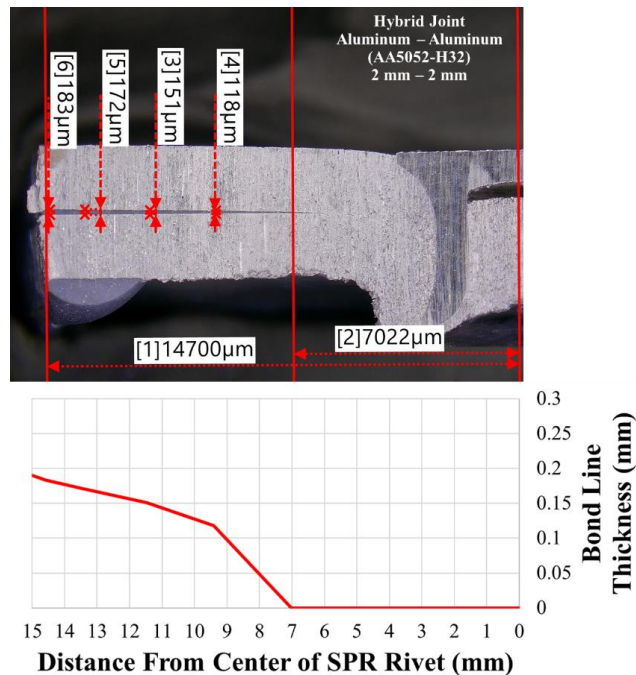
Bond line thickness measurements on hybrid joints made with 2 mm-thick aluminum AA5052-H32 alloy.
